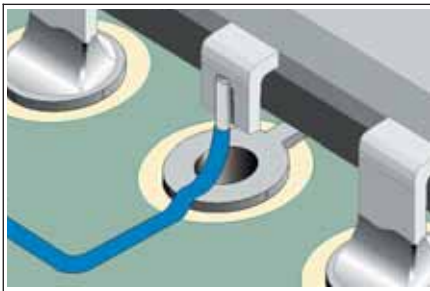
Acceptable Wire soldered to clipped lead on component side. +
